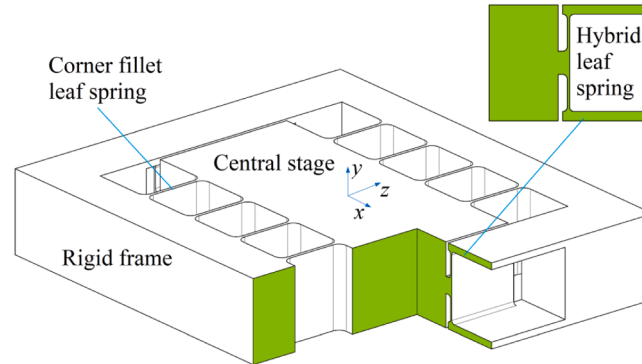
Cutaway view of the guiding mechanism designed with CFLSs and HLSs.
